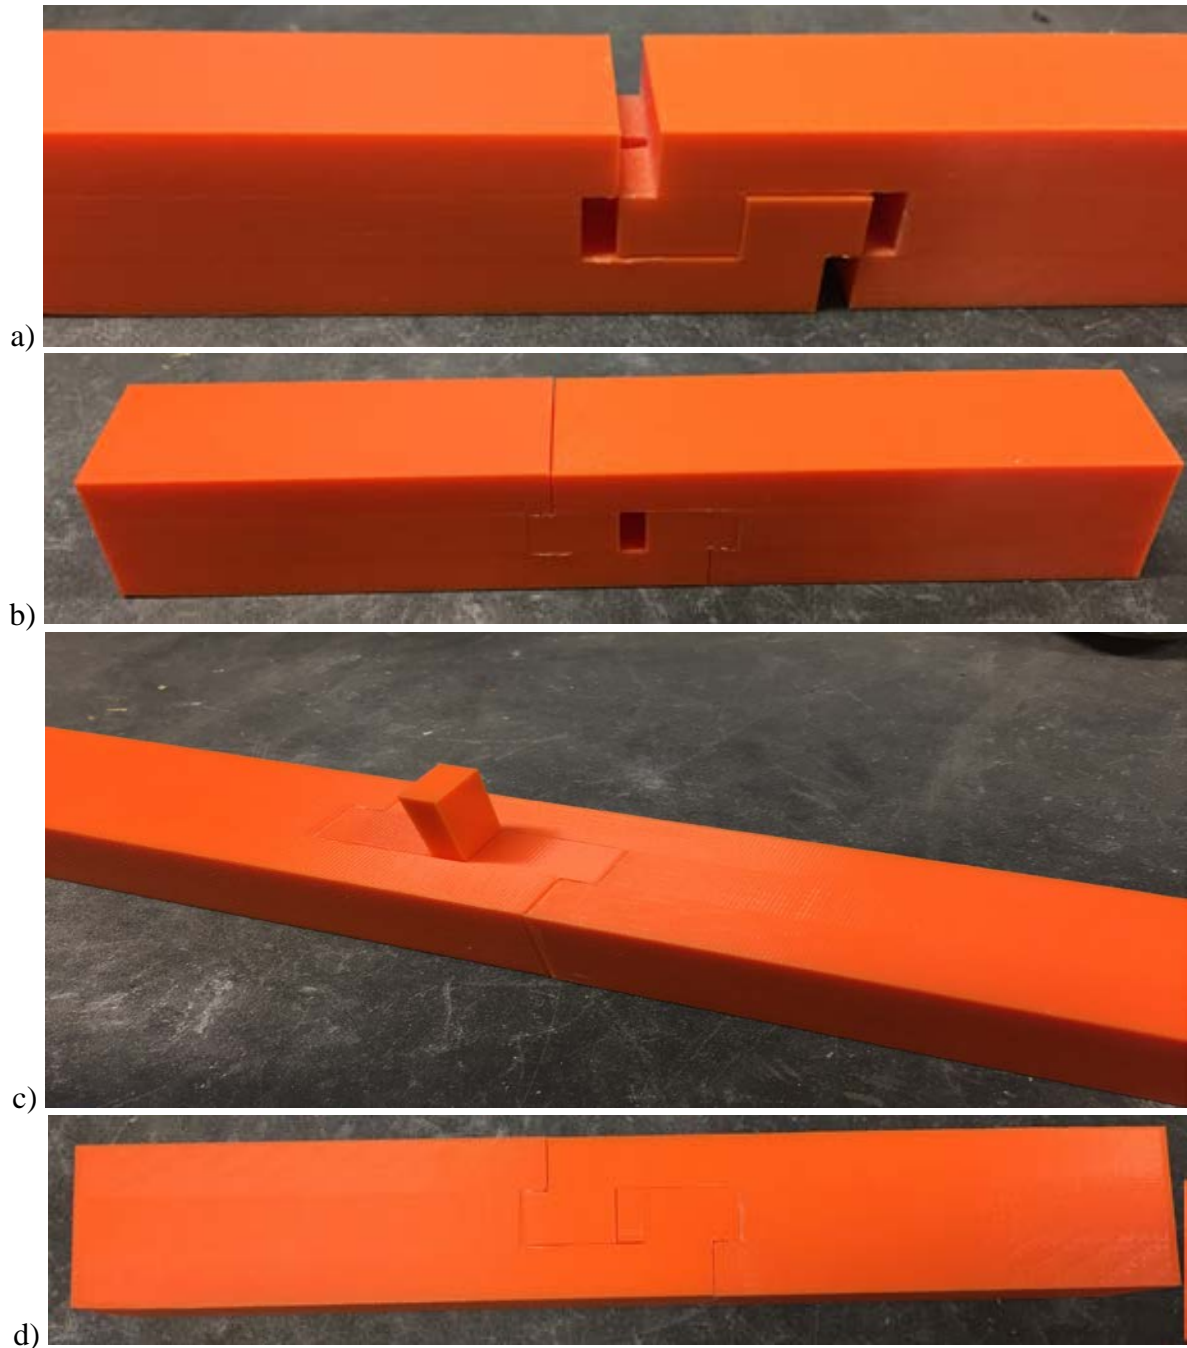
Two connections were joined (a,b) and the pin was inserted in the hole (c) to complete the assembly (d).
